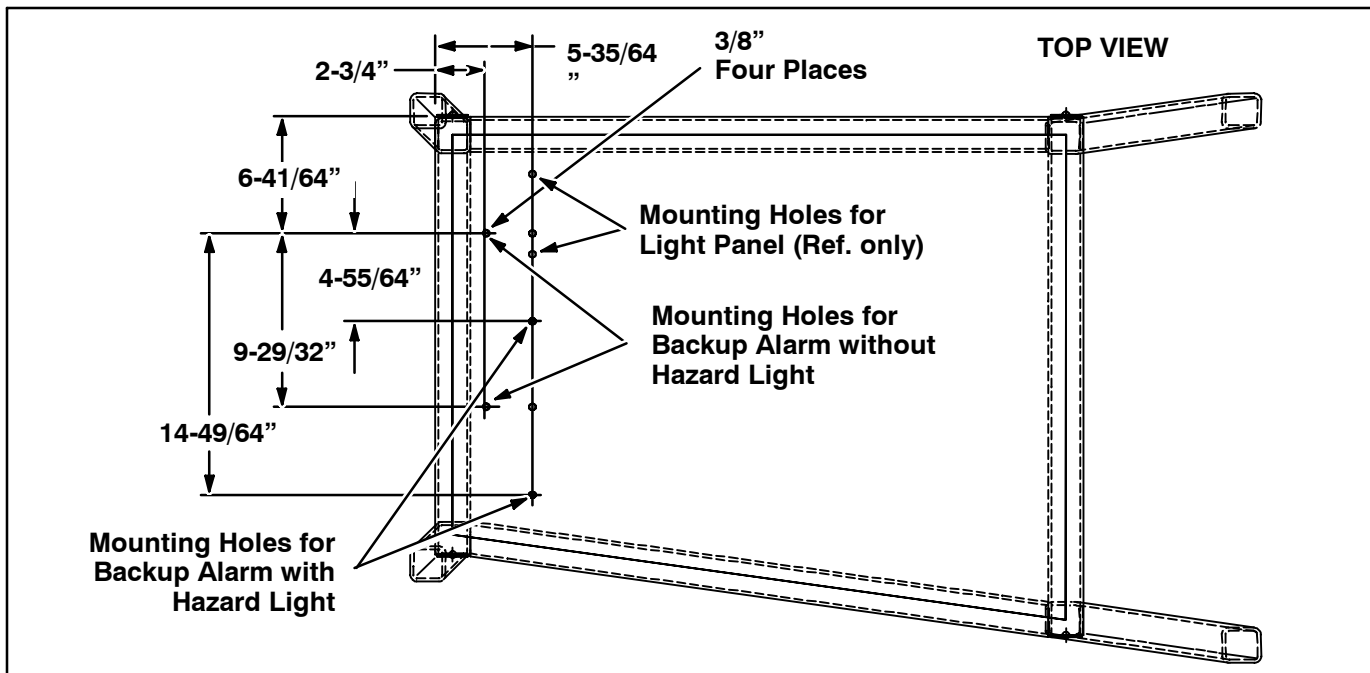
Hole Locations in Machines With Overhead Guard or Cab
